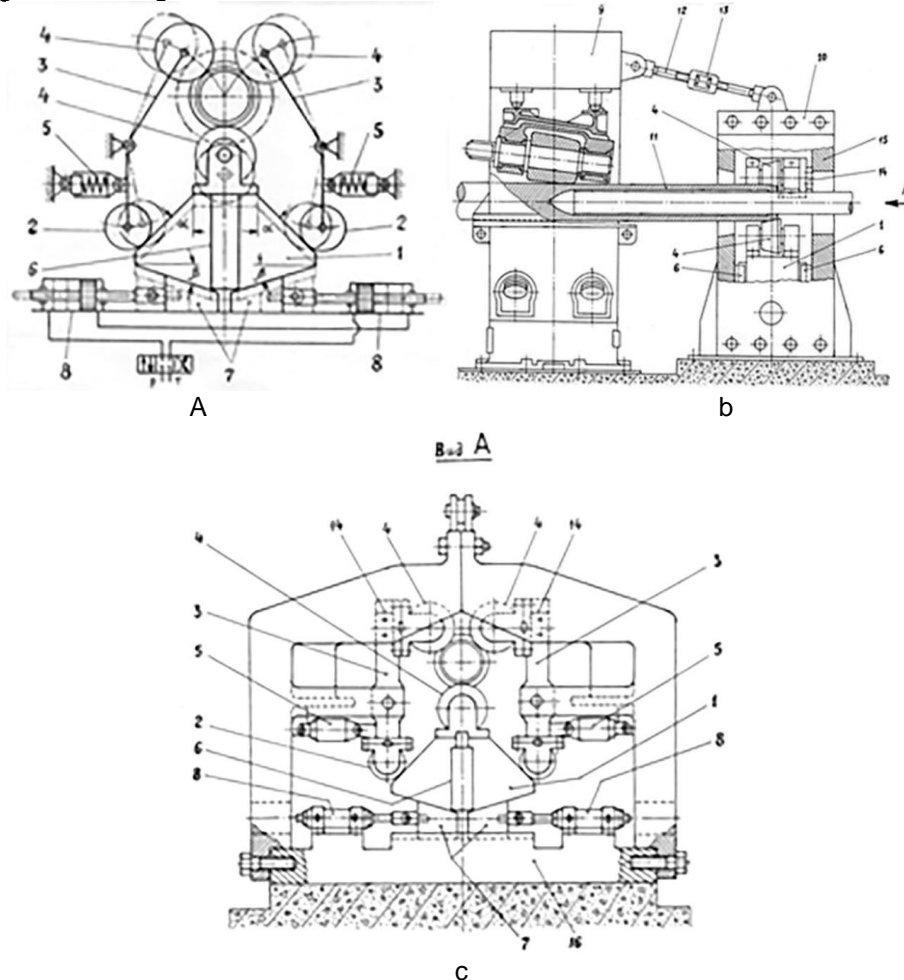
Stand of a long-roll mill and a device for sharpening a sleeve: a - kinematic diagram of a device for sharpening a sleeve; b - main side view; c - view from the arrow in Fig. 6b; 1 - cam; 2 - roller; 3 - lever; 4 - deforming roller; 5 - compression spring; 6 - guide; 7 - wedge; 8 - hydraulic cylinder; 9 - piercing mill; 10 - device for sharpening a sleeve; 11 - sleeve; 12 - tie; 13 - tie nut; 14 - support plate; 15 - housing
